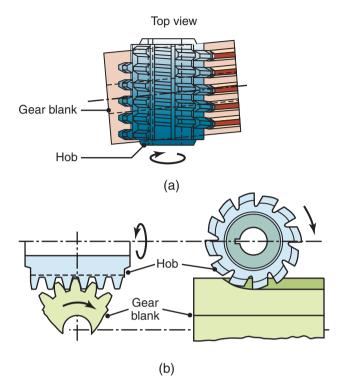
(a) Hobs, used to machine gear teeth; (b) schematic illustration of gear cutting with a hob. *Source:* (a) Courtesy of Sandvik Coromant.
